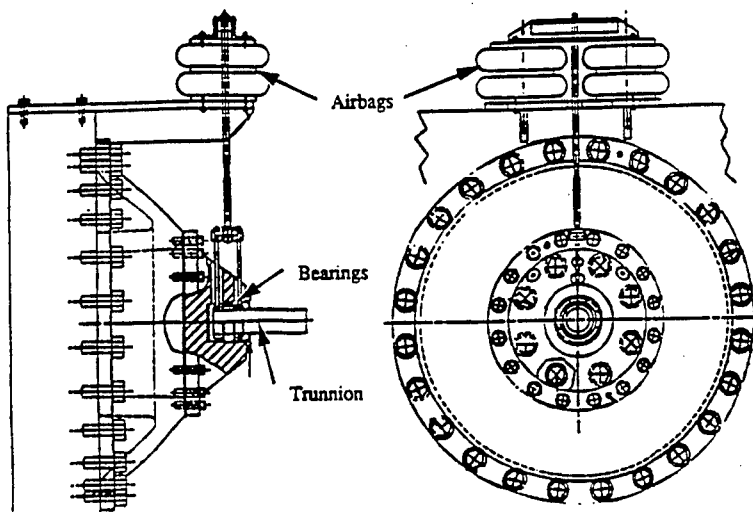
Space Station Module (SSM) Prototype in Universal Test Fixture
